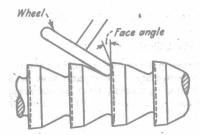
Wheel plane is set a greater angle than the face angle of the broach tooth, in order to avoid reducing the face angle when sharpening.
